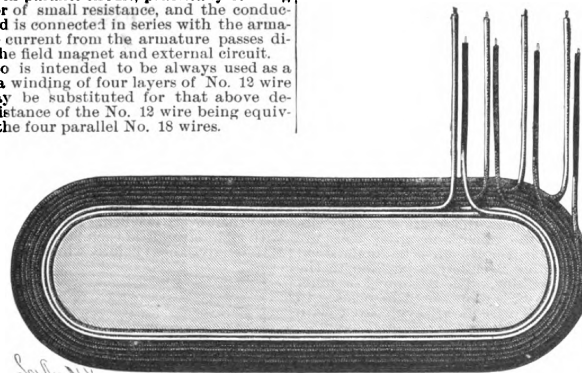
SECTION OF ONE ARM OF THE FIELD MAGNET, SHOWING WINDING.
